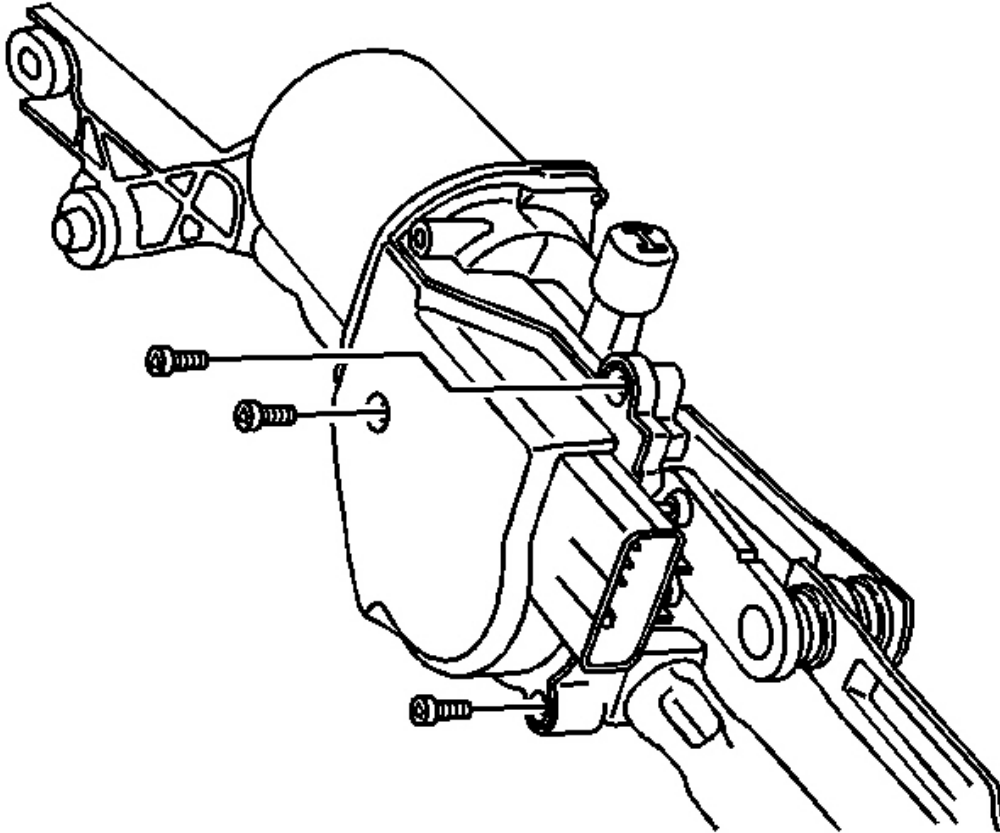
View Of Wiper Motor Cover Retaining Screws
